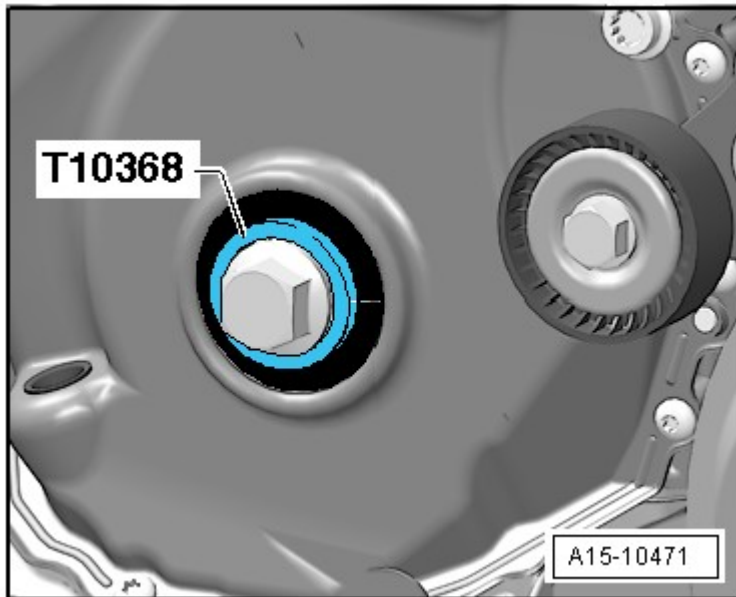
Identifying Vibration Damper Bolt And Thrust Piece T10368
